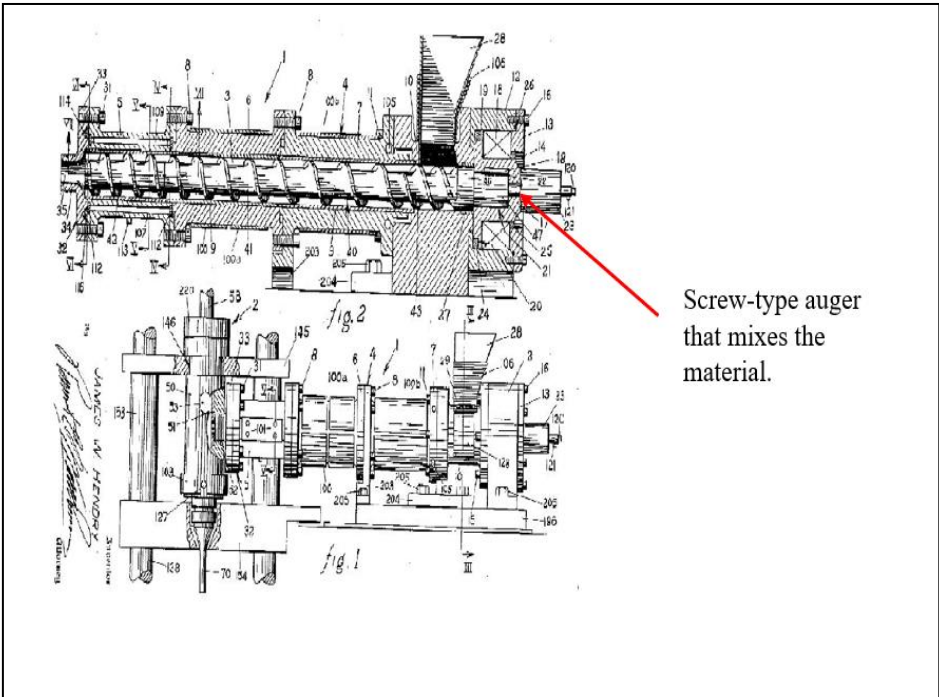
Patent drawing of James Watson Hendry's injection moulding machine.
